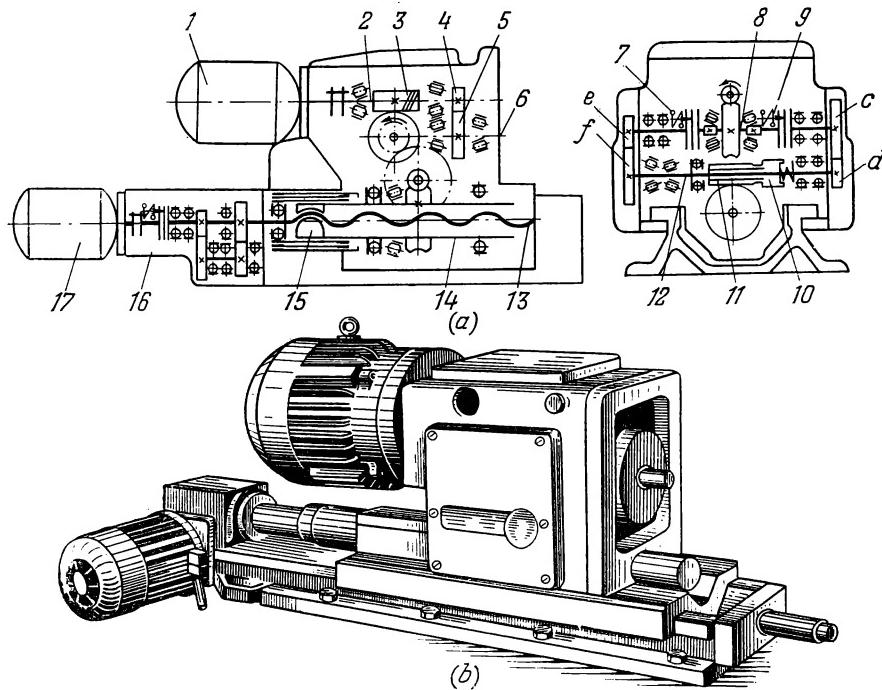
Power unit manufactured by the Minsk Transfer Machine Plant:
